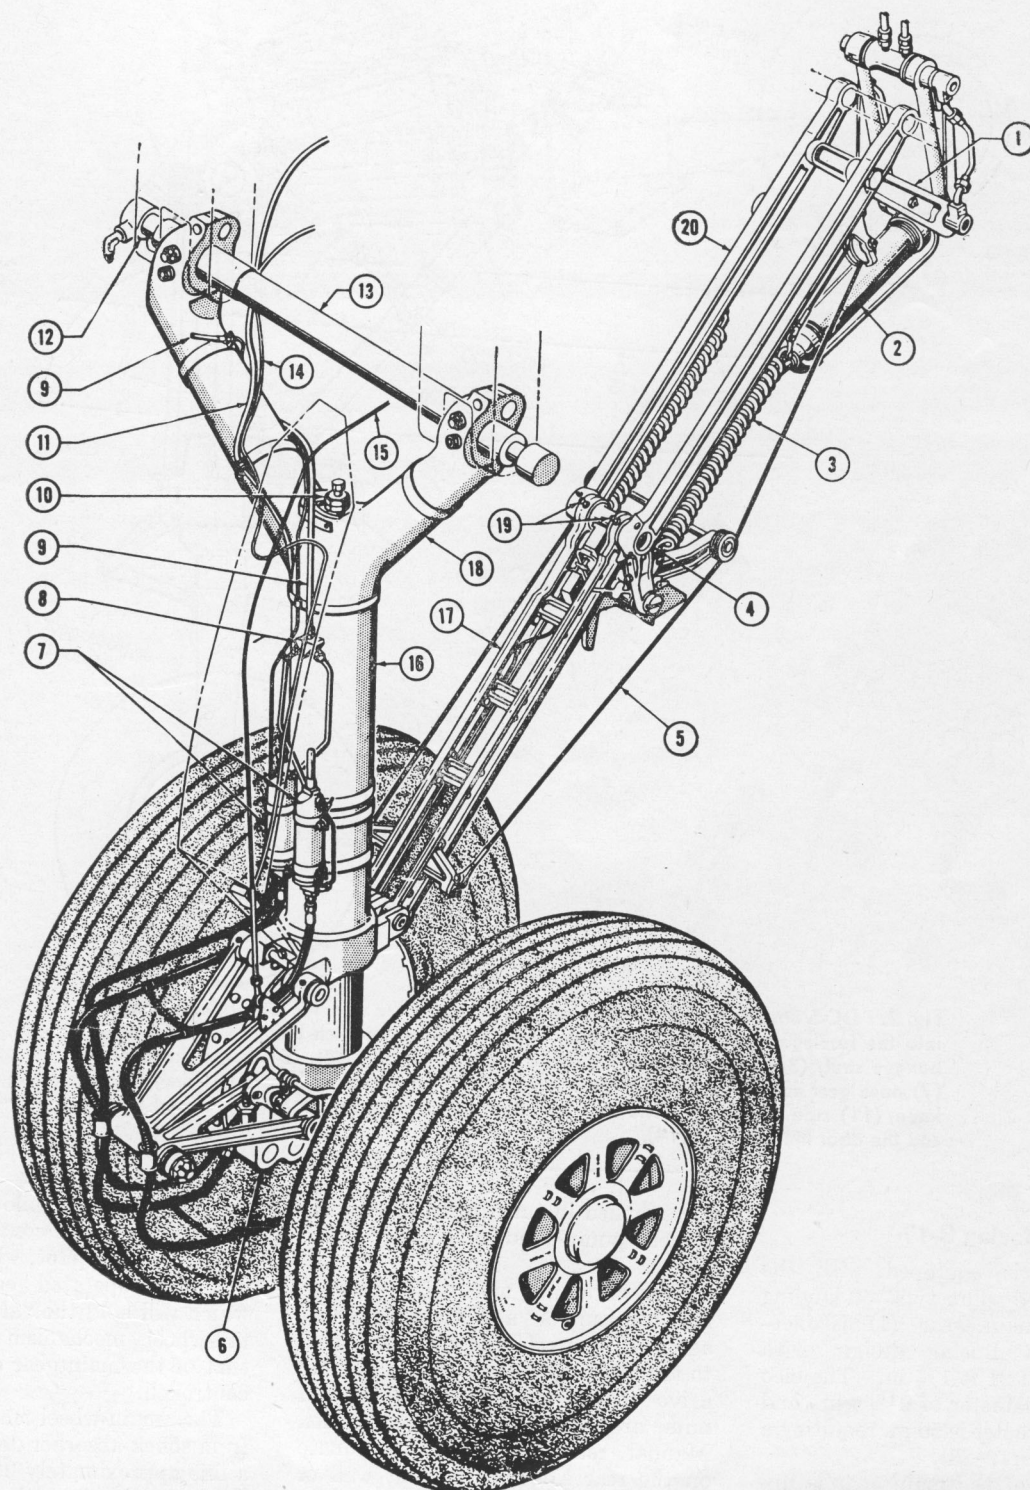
The main landing gear of the Douglas DC-6 includes: (1) actuating strut linkage; (2) hydraulic actuating strut; (3) bungee spring; (4) drag linkage knee; (5) bungee cables; (6) self-adjusting spot brake assembly; (7) brake lockout cylinders; (8) Wye fitting; (9) hydraulic brake line; (10) shock-strut oil-air valve; (11) air brake line; (12) hydraulic brake gland; (13) axis tube; (14) conduit from safety switch (right main gear only); (15) antiretraction Arens control cable (right gear only); (16) shock strut; (17) lower drag linkage; (18) shock-strut fork; (19) Zerk fittings (typical); (20) upper drag linkage.
